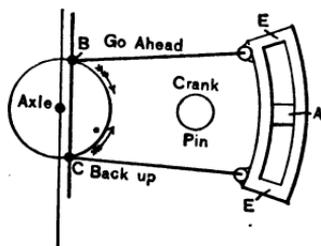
Location of Stephenson Eccentrics on Axle, in Relation to the Crank-Pin.
